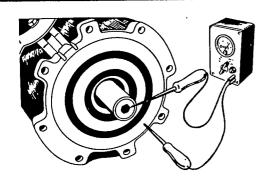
CHECKING ROTOR WINDINGS FOR GROUND
